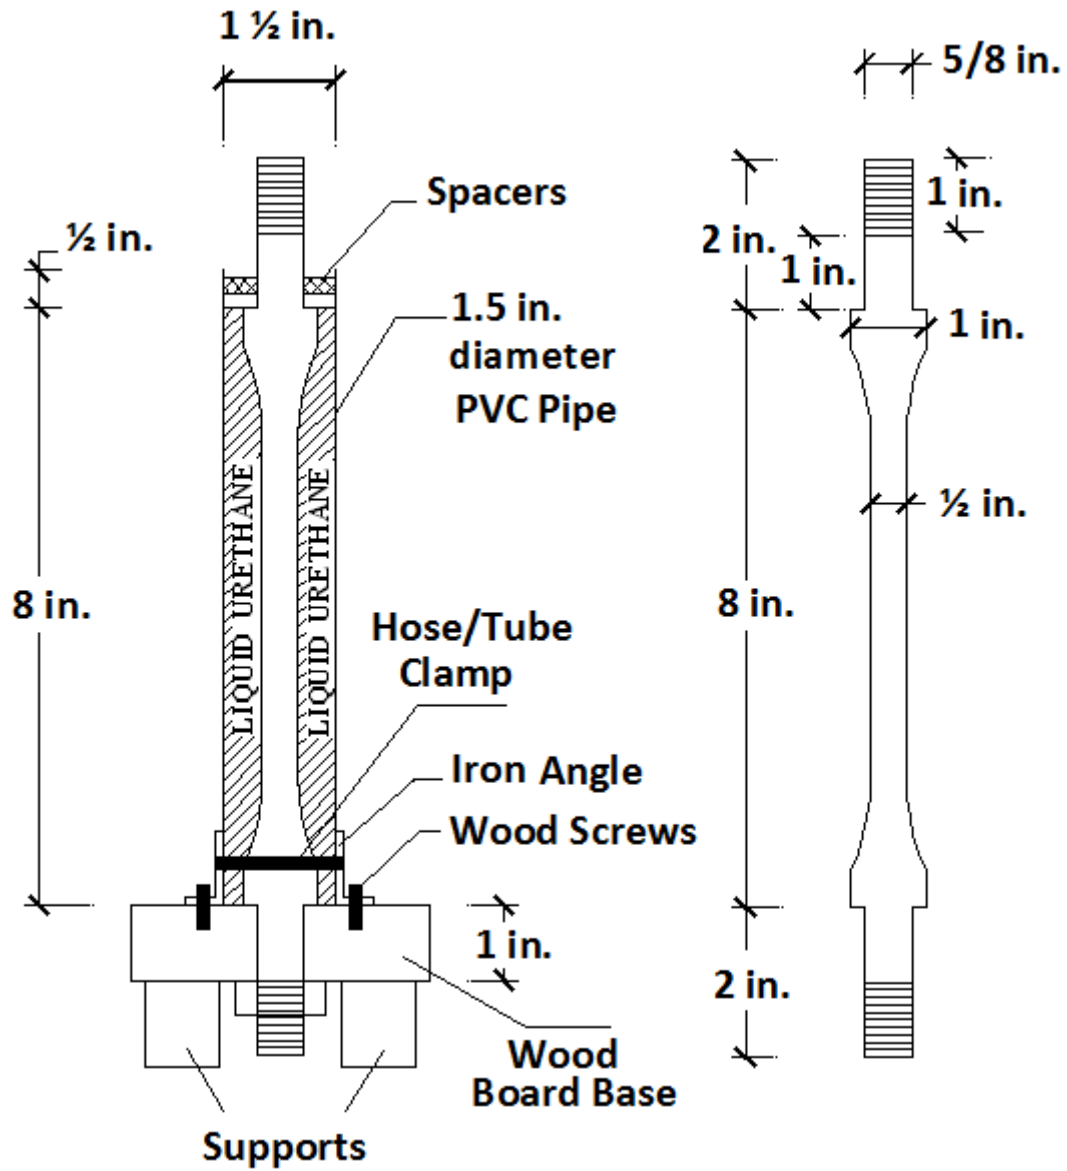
Inner Core, Bar Type C, Fabrication Set-Up, Sketch.
